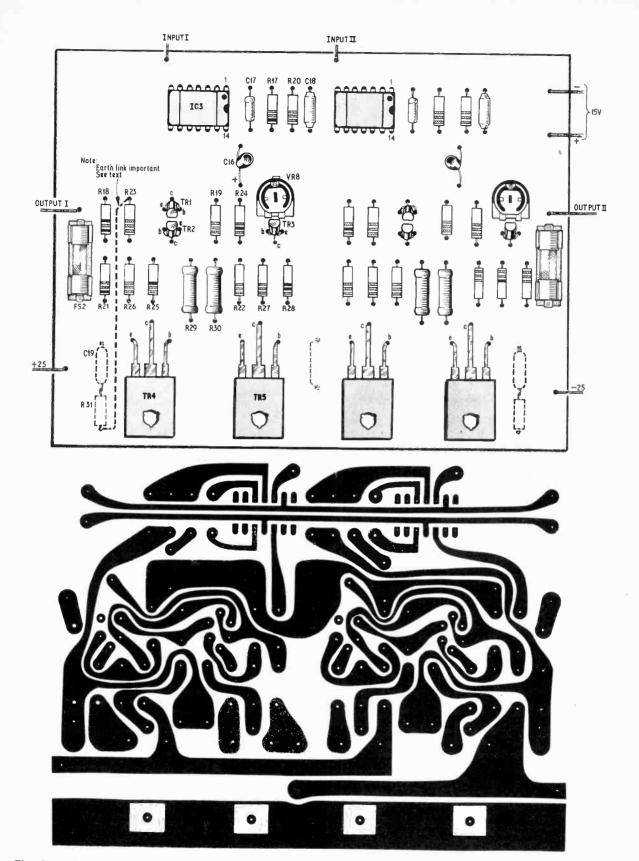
Component layout and printed circuit master (full size) of one of the two power amplifier boards. Components on the right are similar to the left channel
